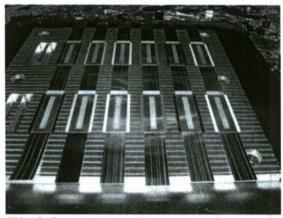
Welded tapes across the supported channels and ribs.
